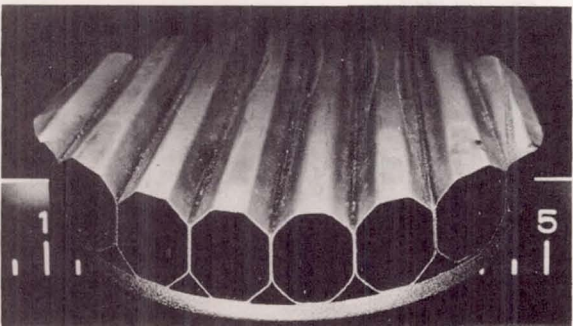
Cutout of rocket nozzle. Electric-discharge machining.
